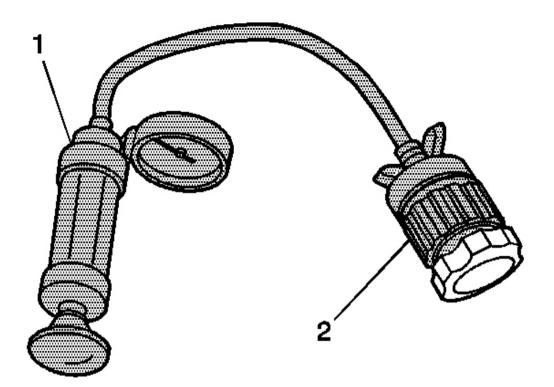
J 24460-01 & J 42401 Courtesy of GENERAL MOTORS CORP.
